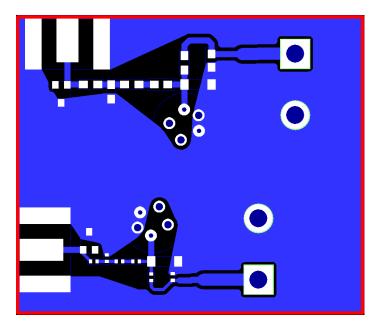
PCB layout with a 0402 and 0201 version of the proof-of-concept voltage measurement module
